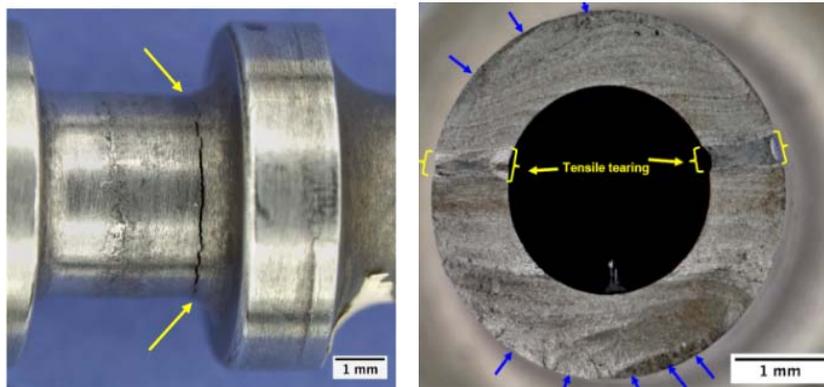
Crack location and fracture surface. Numerous crack origins, with multiple small fatigue cracks having merged to form single crack fronts
